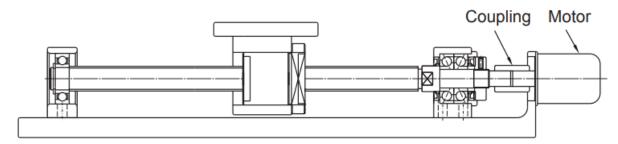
Ball Screw Attached to Motor via Coupler [27]
